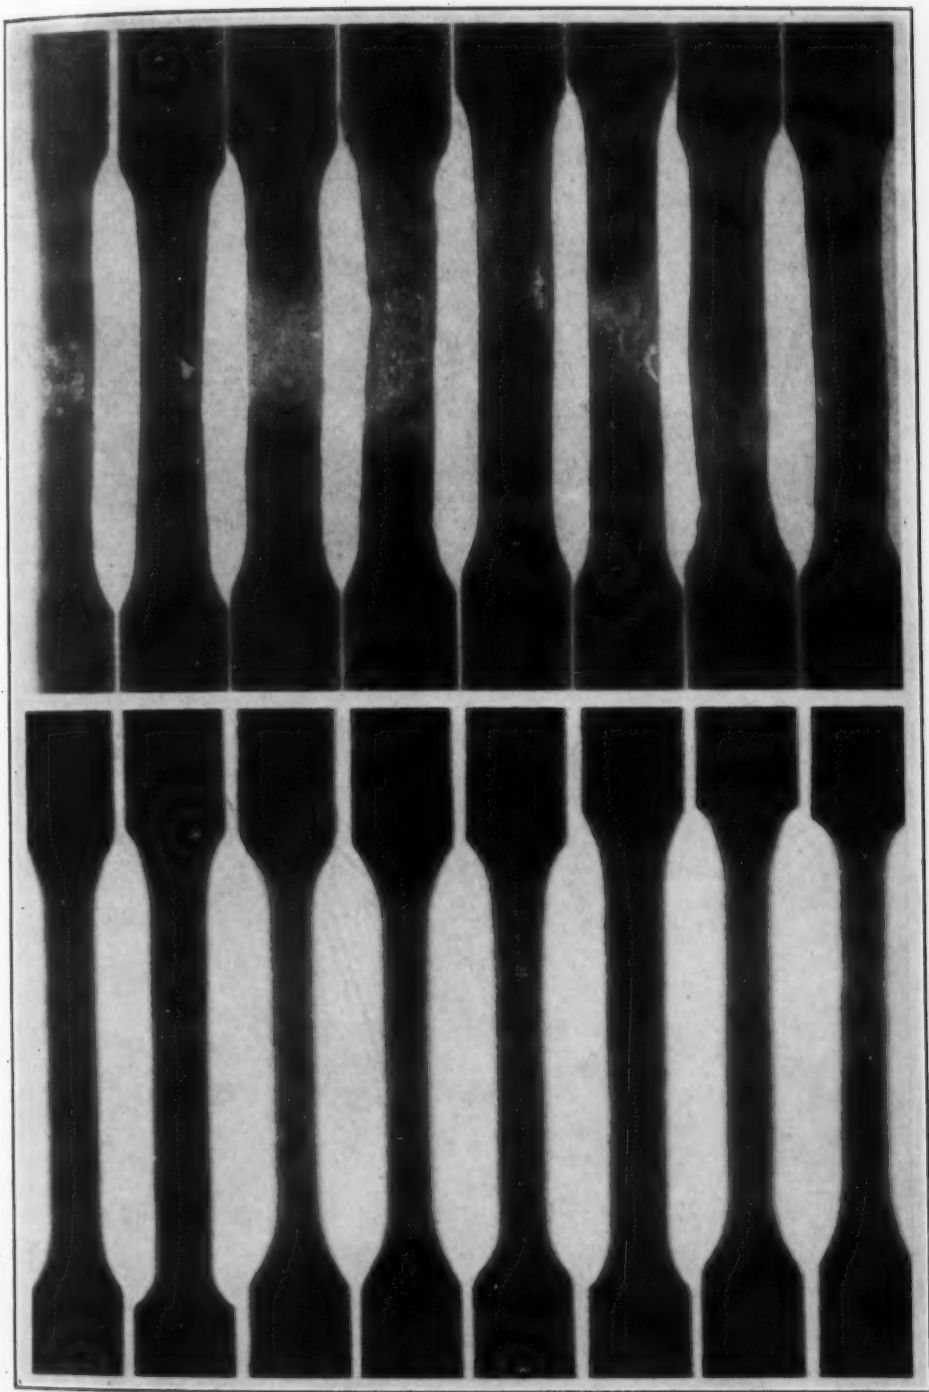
A (Upper)—Welded Sand-Cast Test Bars—Method of Welding Practiced When X-ray Work was Begun.
